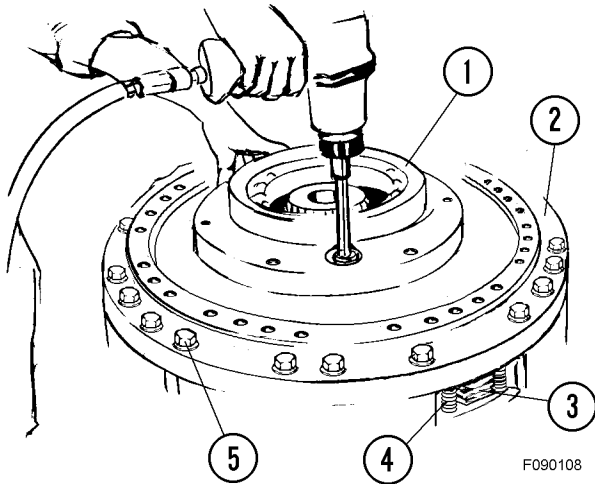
NUMBER FOUR RING GEAR REMOVAL
